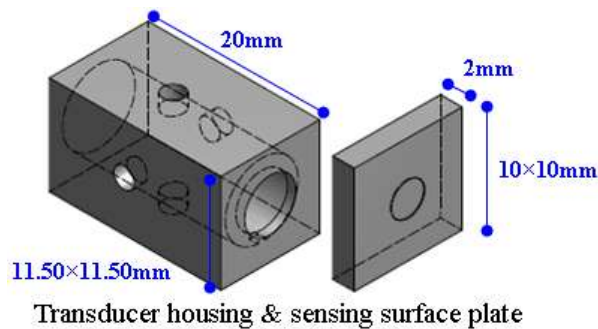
Overall dimensions of the transducer housing and the sensing surface plate.
